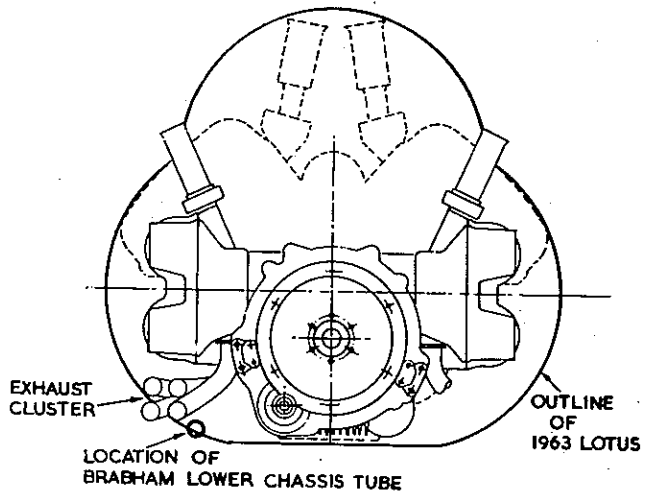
Outline of 16 cyl horizontal engine superimposed on V-8
